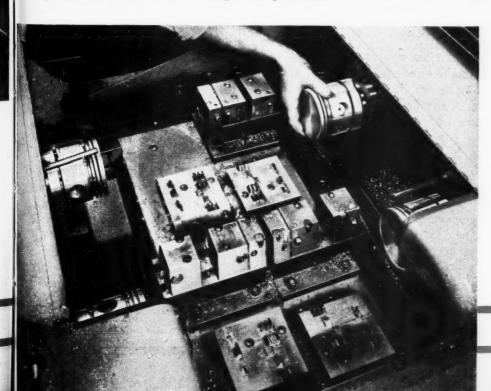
Double-end, four-spindle machine for semi finish-turning the skirt, finish-turning the ring lands, and rough- and finish-skiving and chamfering the ring grooves of aluminum-alloy pistons
